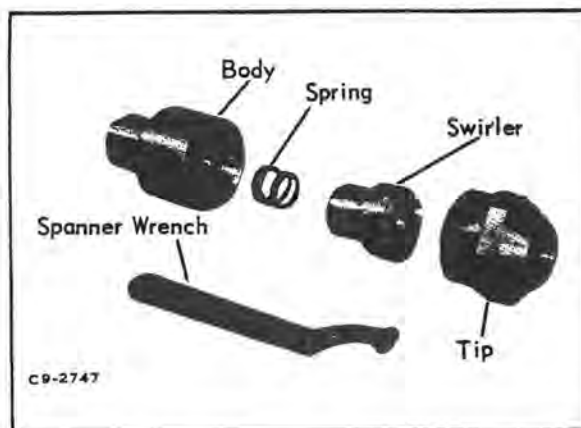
BURNER NOZZLE ASSEMBLY
